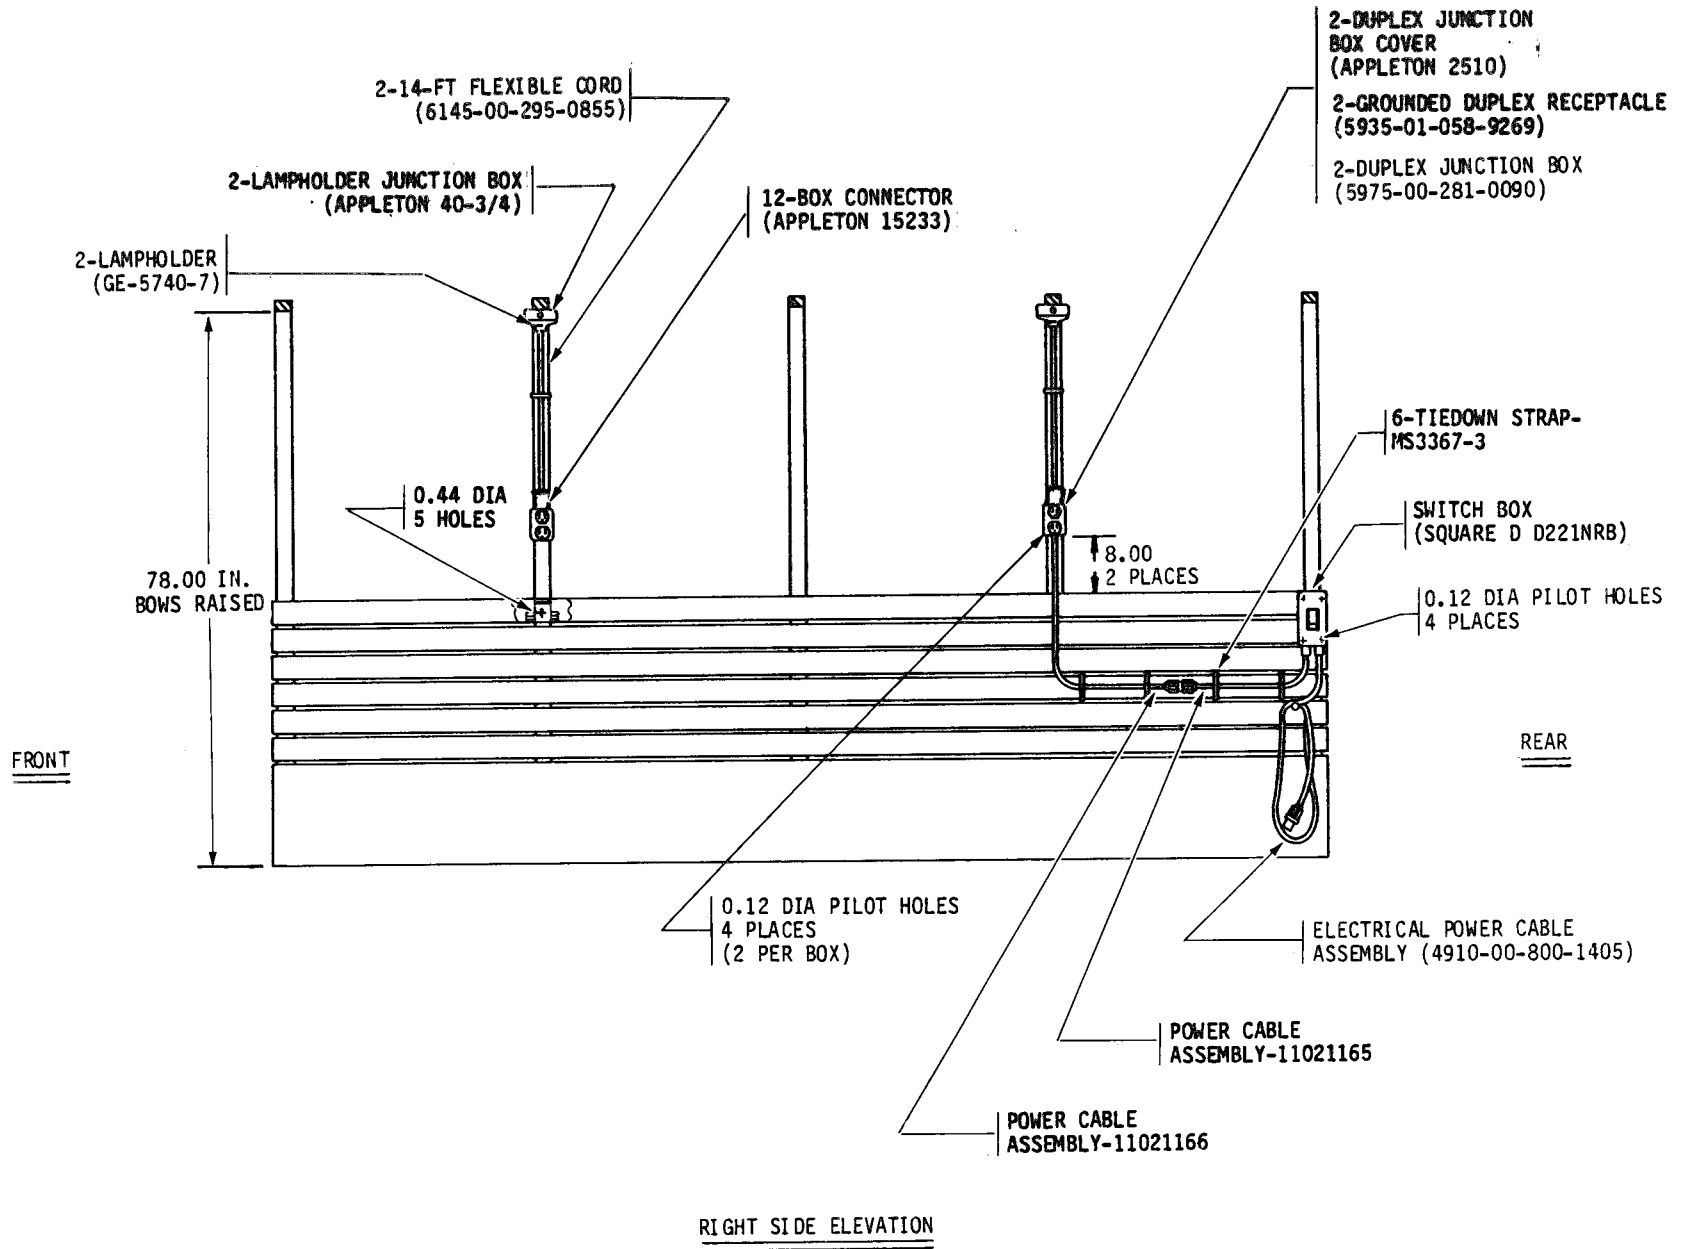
Electrical components to be mounted, unit 2, M35A2, right side elevation.
